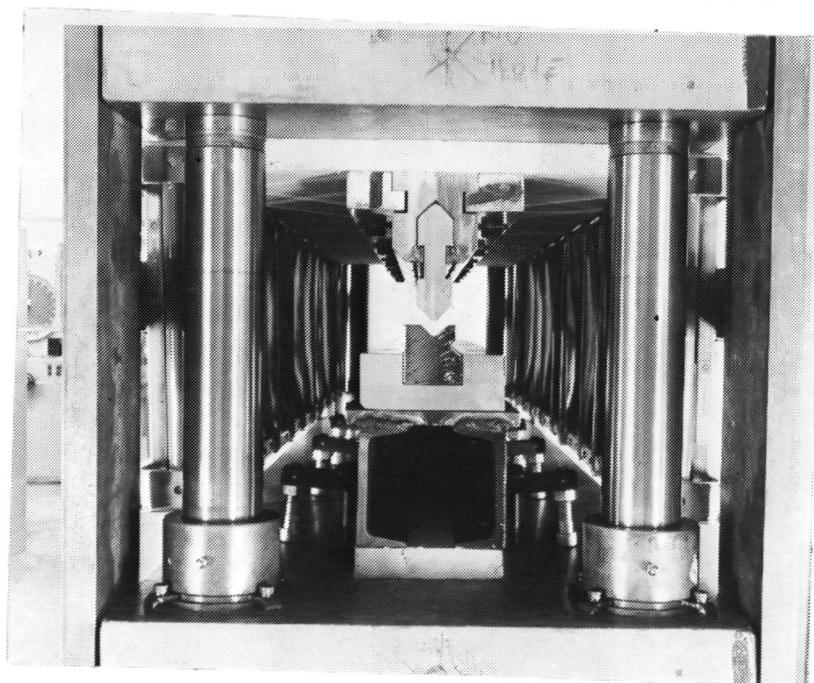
Closeup View of Die set in Hot Forming Press.
